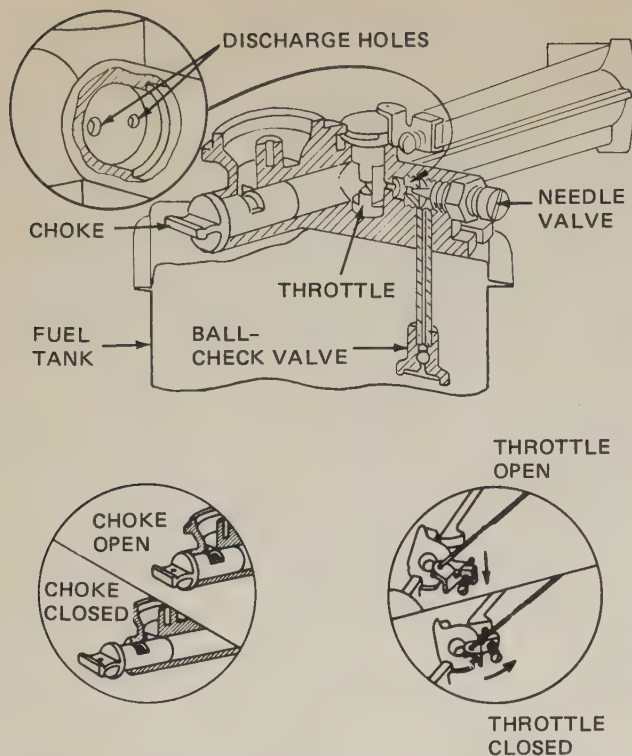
Cutaway view of a suction-type carburetor. Note the round slide-type carburetor choke to the lower left. (Briggs & Stratton Corporation)
